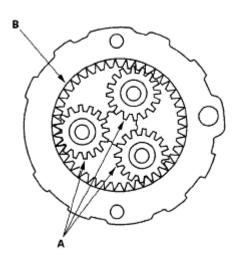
Identifying Planetary Gears And Internal Ring Gear Courtesy of AMERICAN HONDA MOTOR CO., INC.
